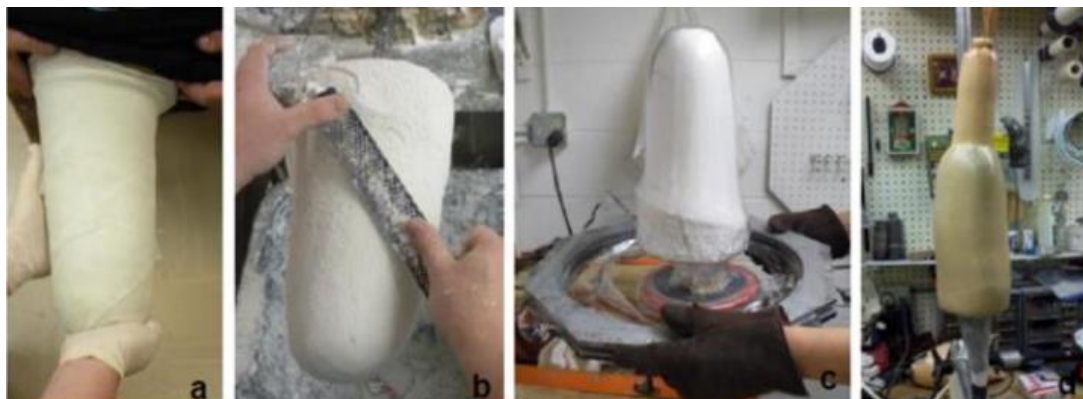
The traditional fabrication process of a transfemoral prosthesis (a) negative mold (B) positive mold (C) testing the mold with a diagnostic socket (D) final product [74].
